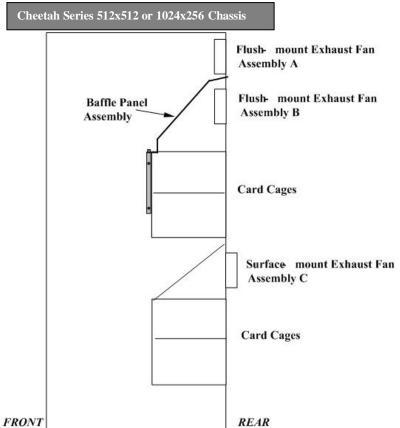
Earlier Cheetah 512 And 1024 Series Baffle Assembly
